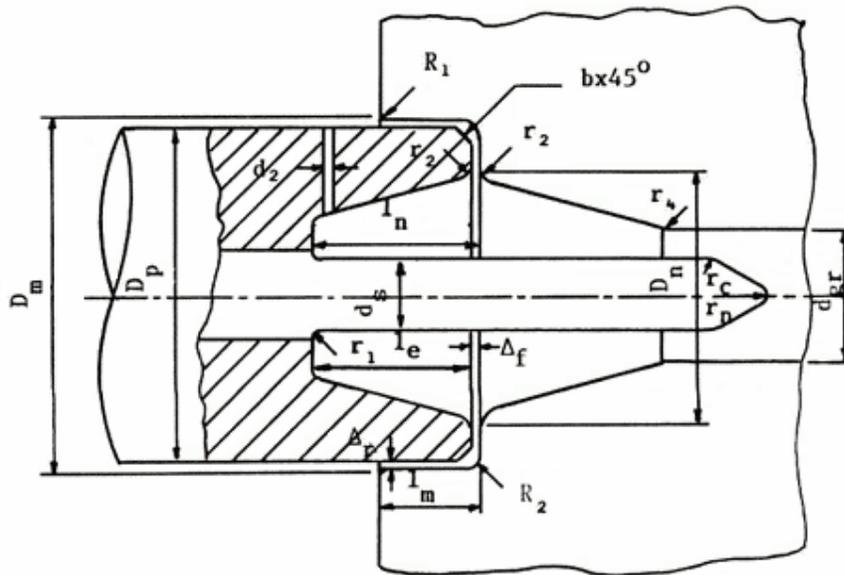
Die cavity in both header tool and gripper dies [3]
